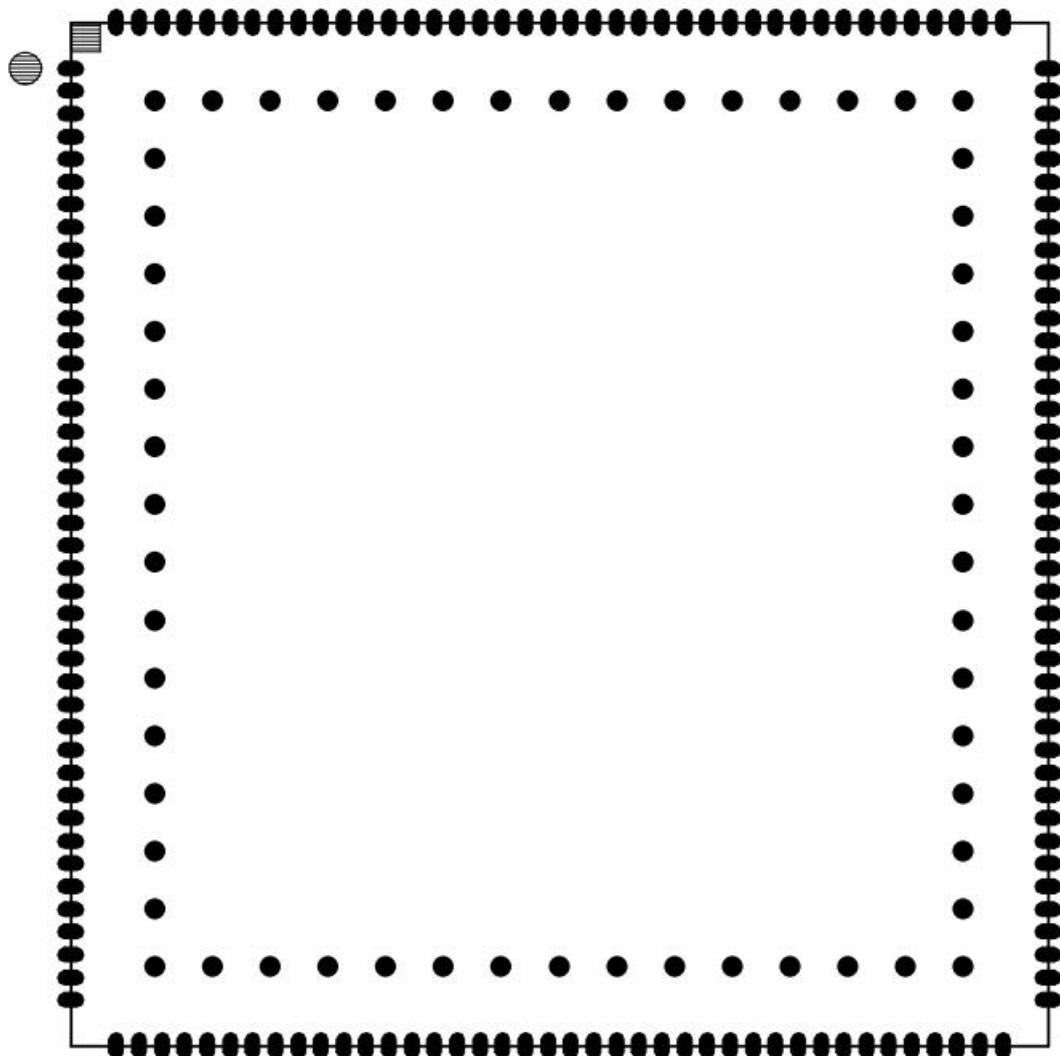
MYC-YT507H Core board PCB encapsulation
